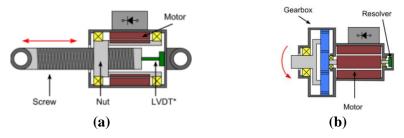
Example of electromechanical actuator types: (a) linear-type and (b) rotational-type (adapted from Wagner et al. [7])
